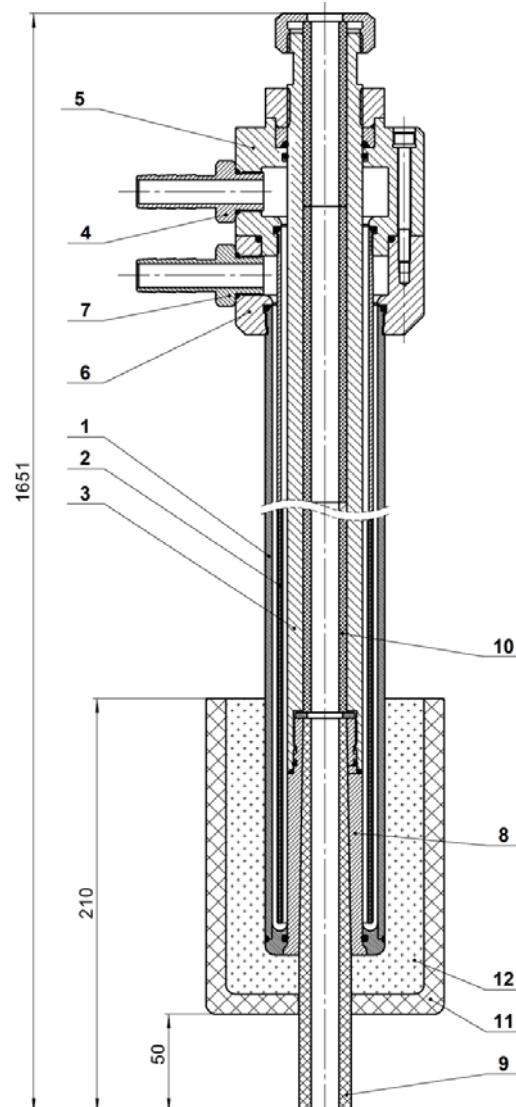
Water cooled mould for upwards continuous casting of metals, /13/: 1-external mould pipe; 2-intermediate pipe; 3-internal copper mould pipe; 4-orifice “in-water”; 5-upper flange; 6-down flange; 7-orifice “out-water”; 8-copper mould; 9-graphite casting die; 10-graphite bushes; 11-graphite-fireclay cup; 12-heat insulating wadding.
